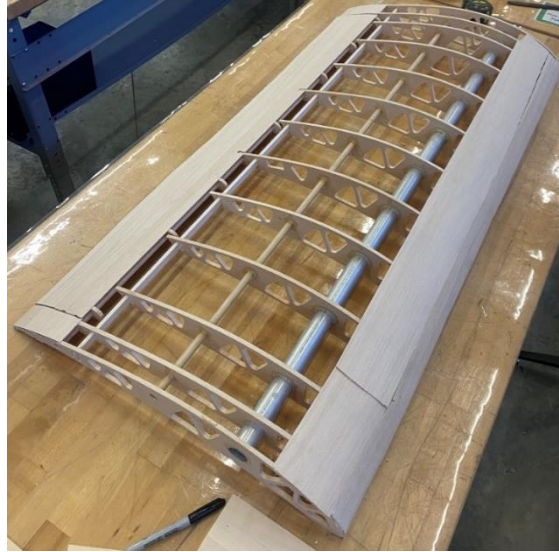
Section of wing made from balsa wood, bass wood, and an aluminum tube
